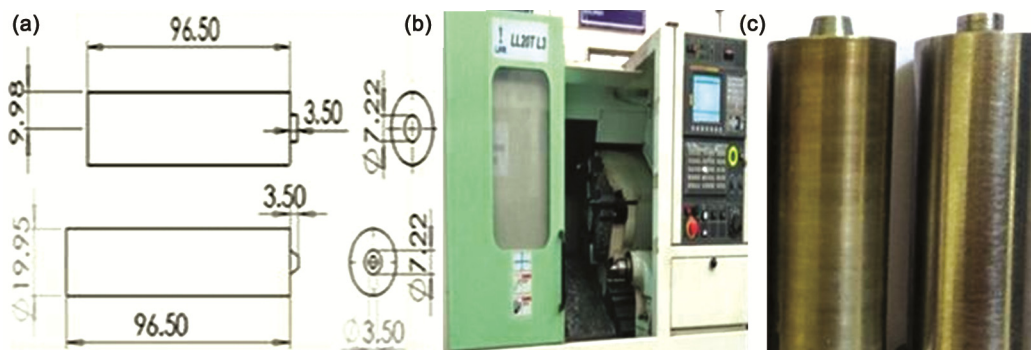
(a) Dimension of tool and (b) CNC lathe machine set up.
